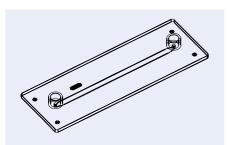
Schematic drawing of chip Fluidic 268 with Luer interfaces to be equipped with double-sided adhesive tape
